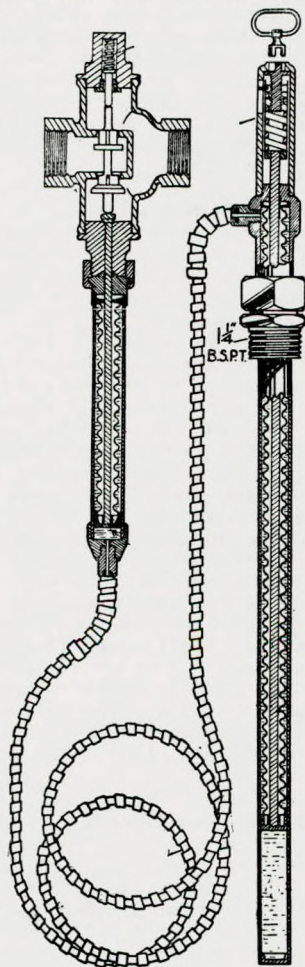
Sectional drawing showing arrangement of Sarco temperature-regulating device.
